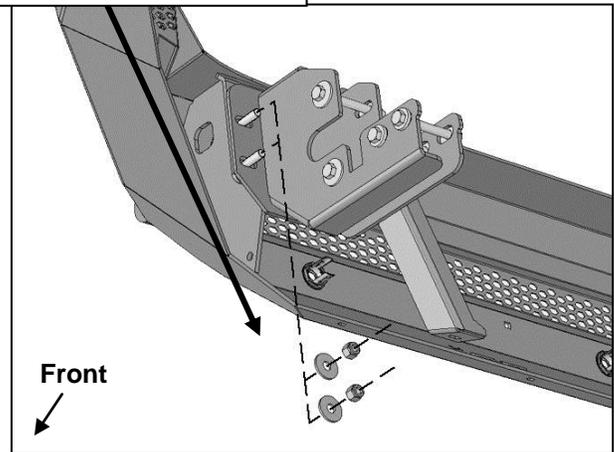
Insert (2) Double Bolt Plates through back of mounting plate on Bumper
